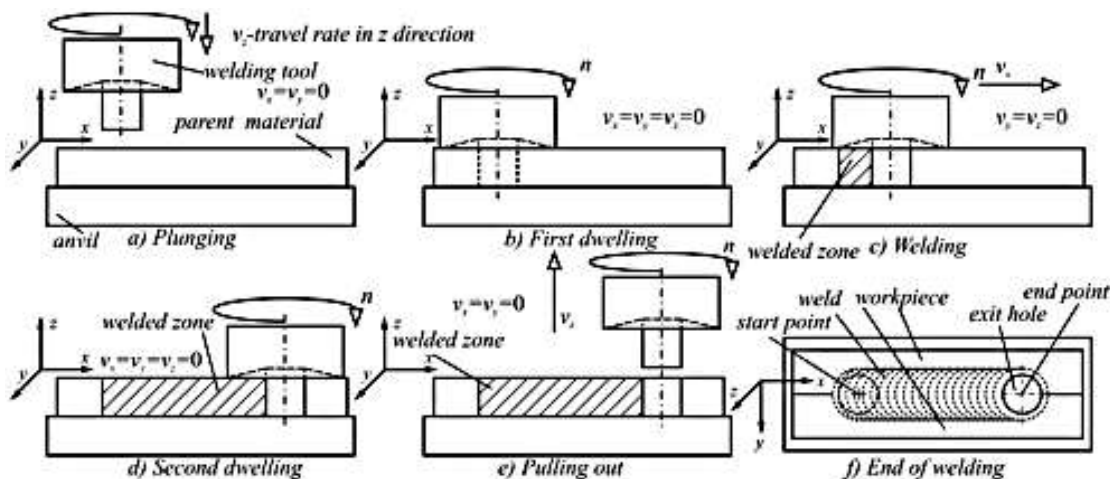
Schematic representation of friction-stir welding process (Courtesy: NASA/TM--1999-209876)
